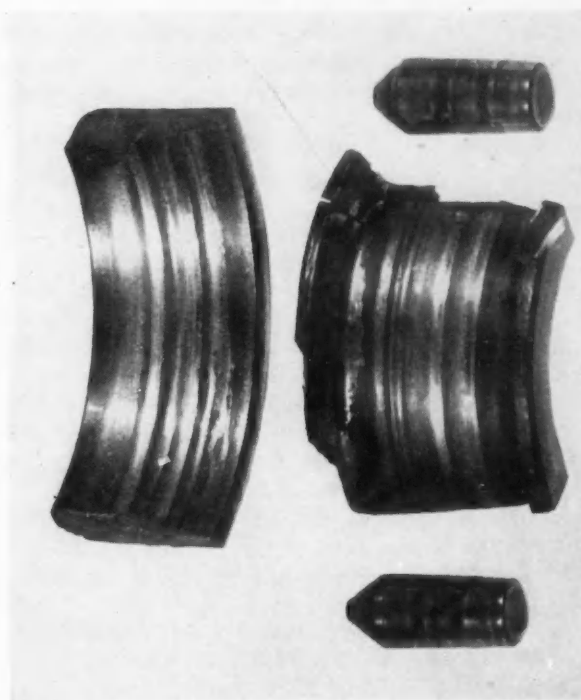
Failure of Taper-Roller Bearings Due to Lack of Lubricant
